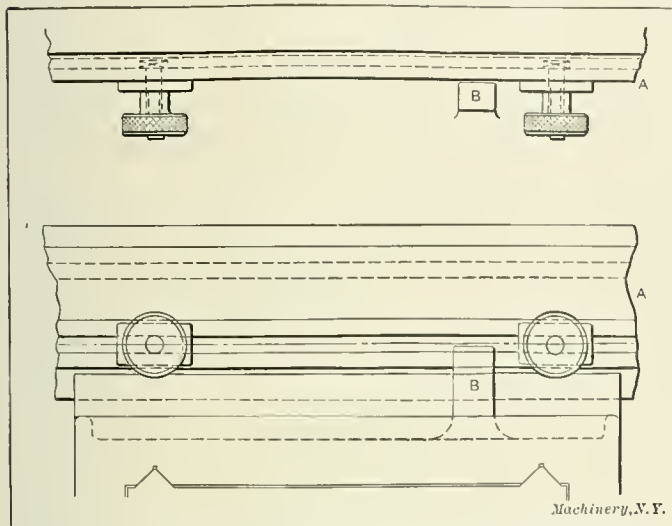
Dead Stops of a Type used on a Cutter-grinding Machine
